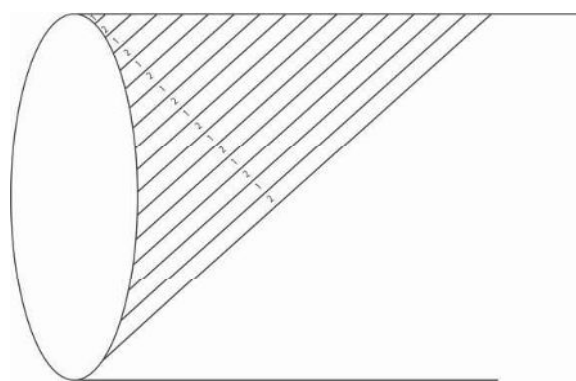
a Disposition of toothed strips 1 and bare strips 2 on the surface of taker-in roller for first mounting of the wire.
